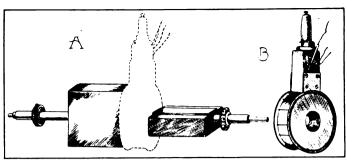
Components of K-W Magneto: A, Rotors and Phantom View of Stationary Winding; B, Winding of Primary and Secondary Wires.
